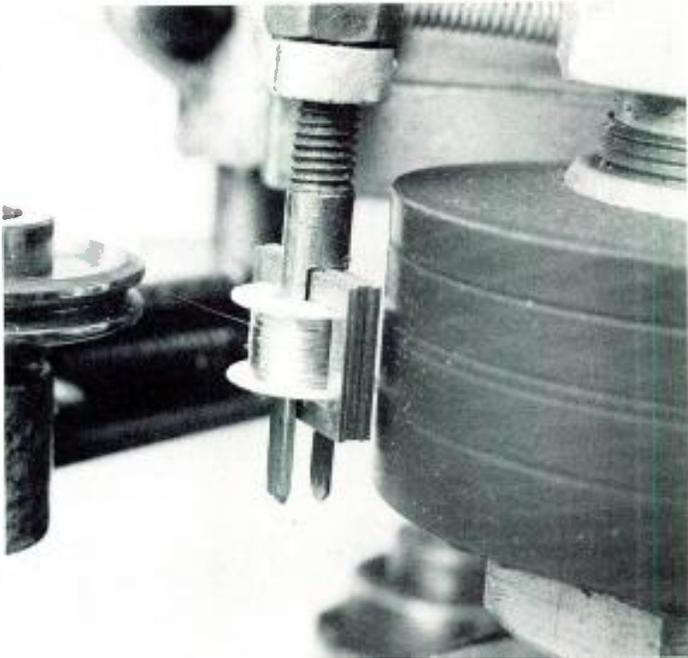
The winding process is shown. The laminations are held stationary while the coil form is friction driven by the rubber wheel at the bottom. The wire comes from the back of the winding machine.
